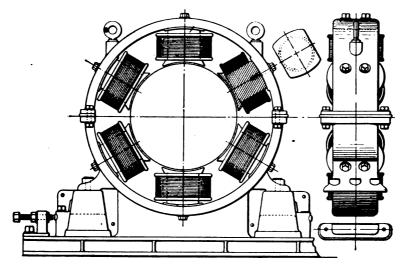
Magnet-Yoke with Parts Bolted Together at Back and Front of Ring.
